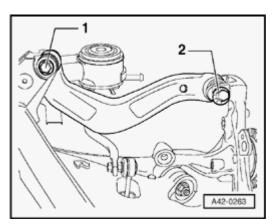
Identifying Inner Bolt & Eccentric Bolt Courtesy of VOLKSWAGEN UNITED STATES, INC.
